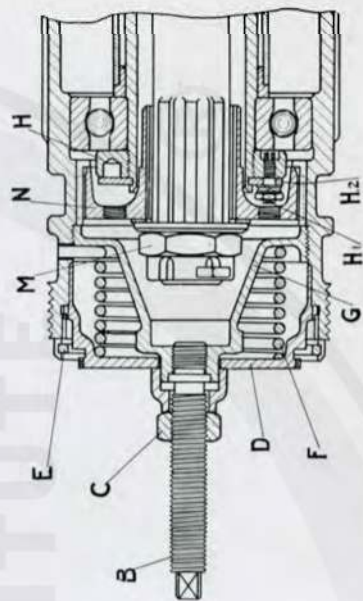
TOOL IN POSITION FOR REMOVING LOCKING RING.
